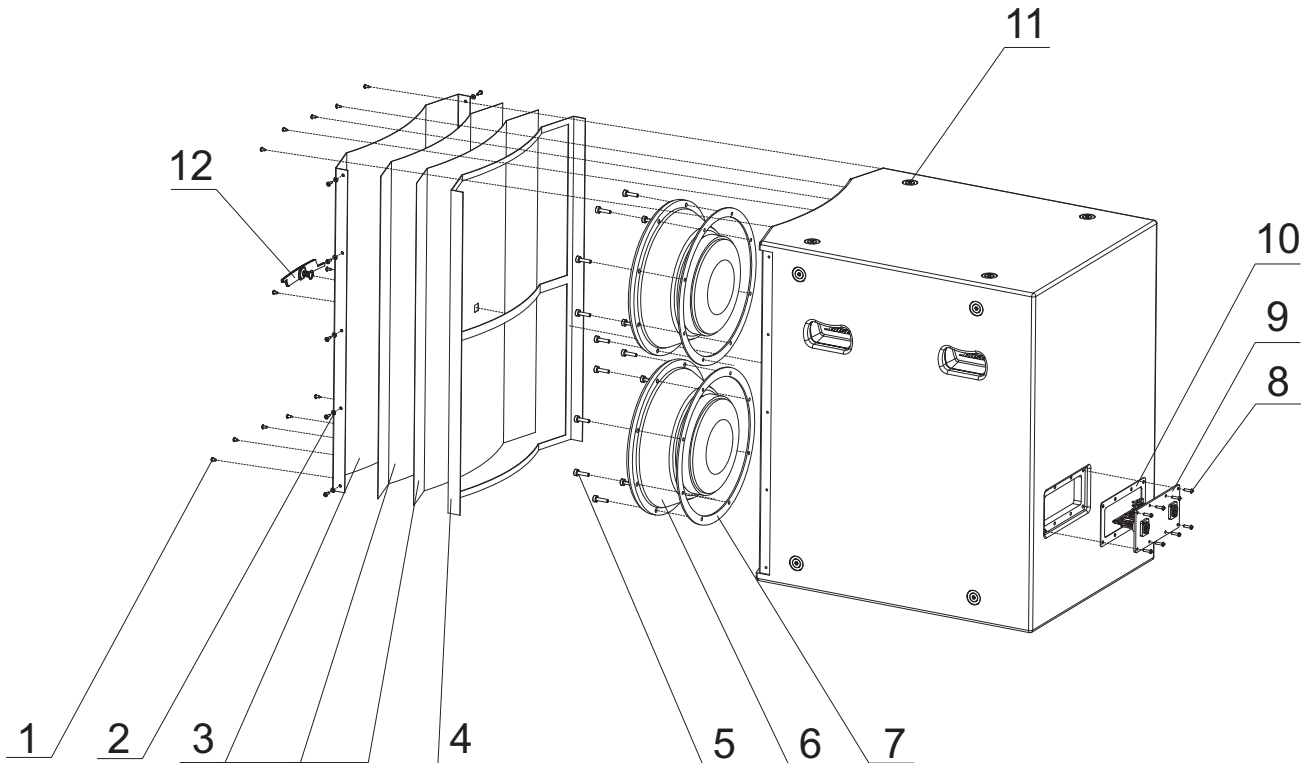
Panaray LT MB24 WR Bass Loudspeaker Exploded View
